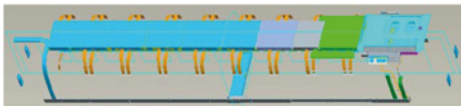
3D CAD Drawing of Ventilation System of High-Speed Train Carriage
